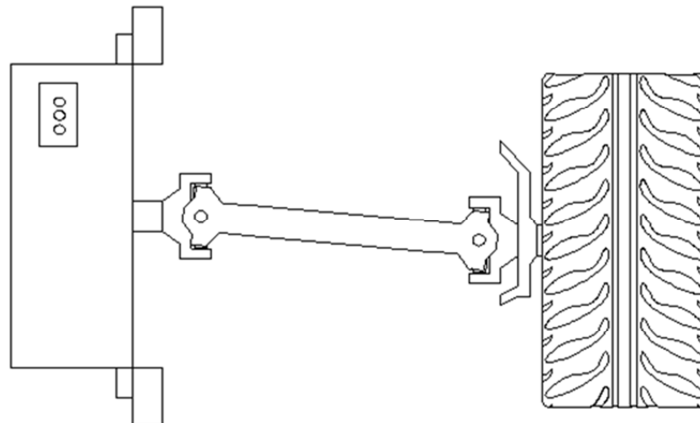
Electrical machine connection to a wheel in the direct drive propulsion system.
